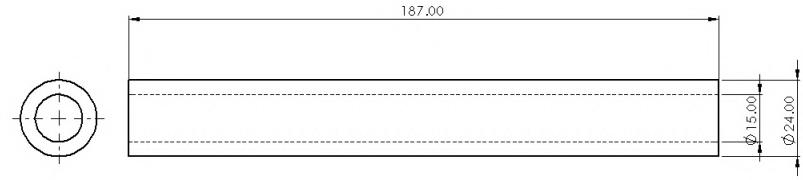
2D Drawing of the Ball Screw housing (All dimensions are in mm)
